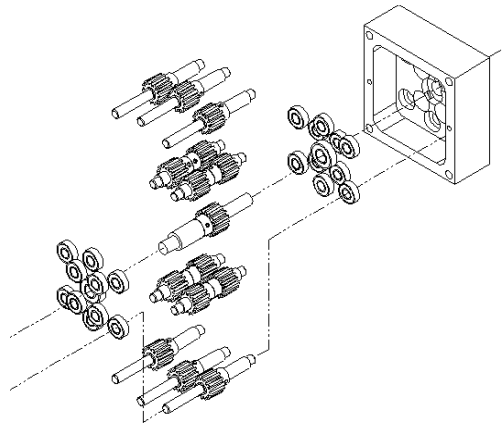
While sitting the gearbox half on its back apply the bearings to their proper shafts again make sure that they are all in good shape.
